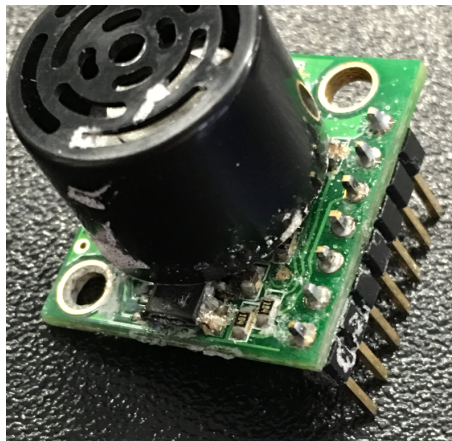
Salt damage to the PCB and corrosion [11].
